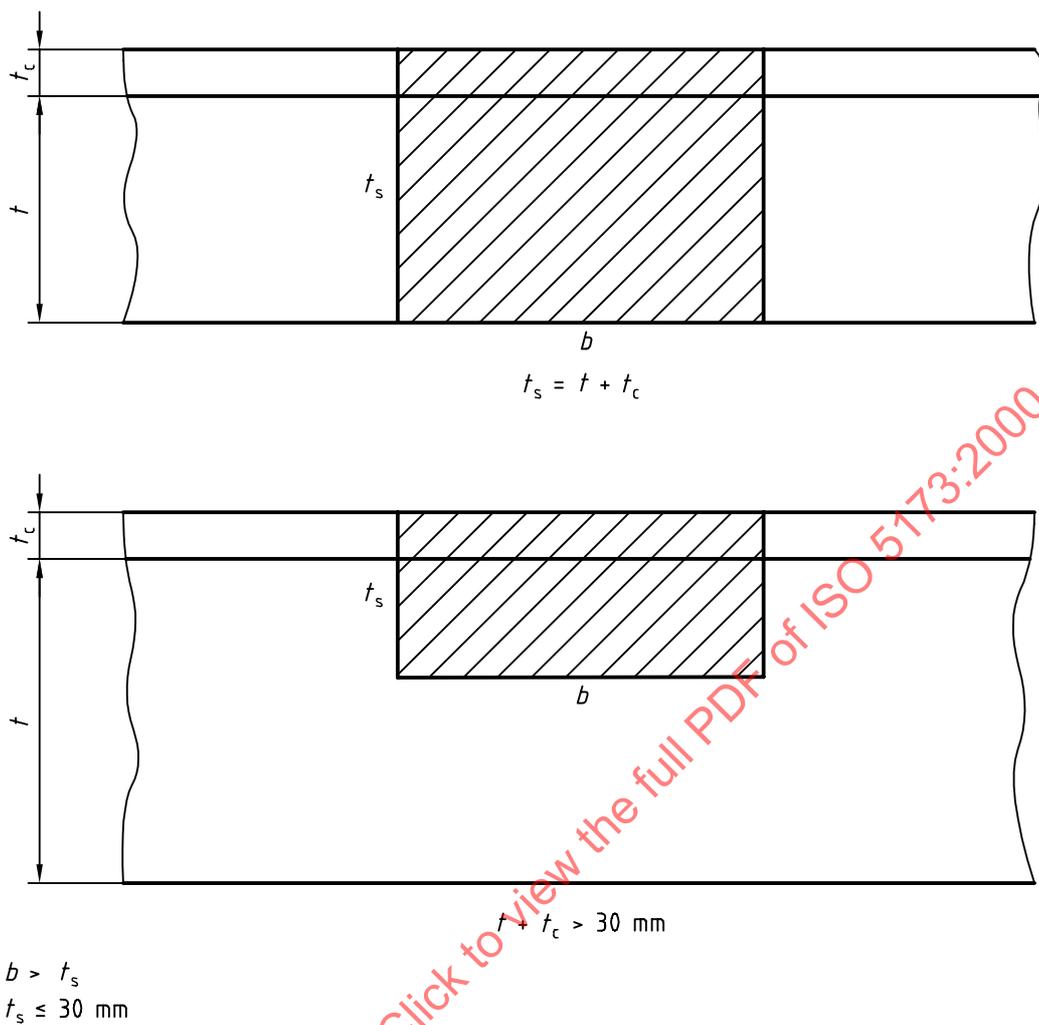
Face bend test specimens for cladding without a butt weld (FBC)
